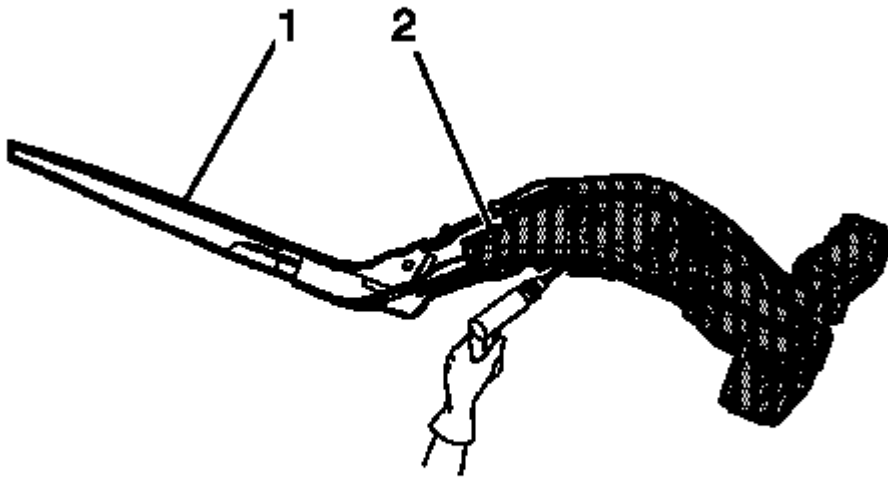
Drilling Out Front Compartment Front Half Rail Factory Welds
